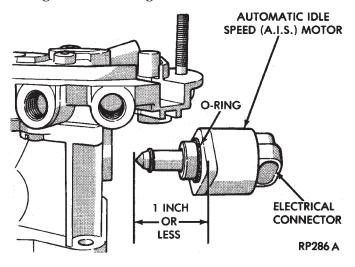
Servicing Automatic Idle Speed (AIS) Motor
